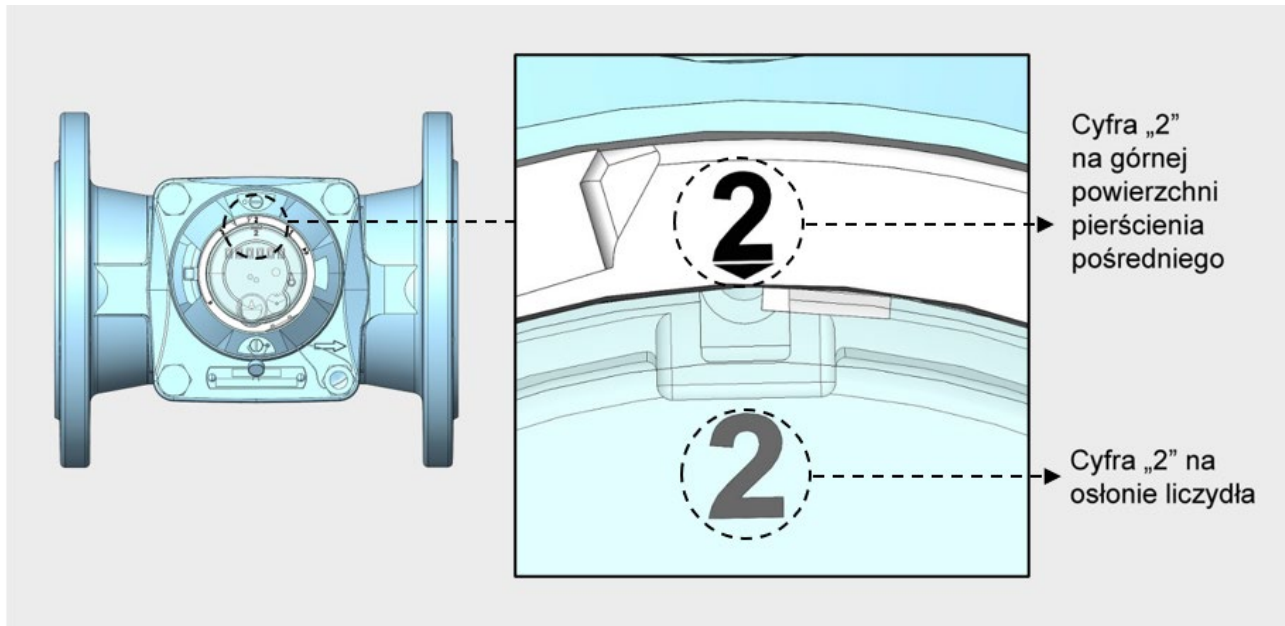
Fitting the spacer ring onto the counting mechanism cover.
